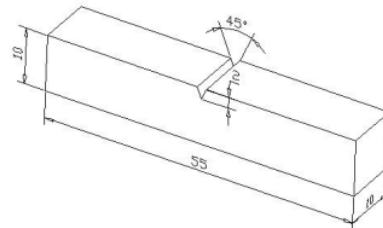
Impact Test Speciment (ASTM E23-96) [5]
